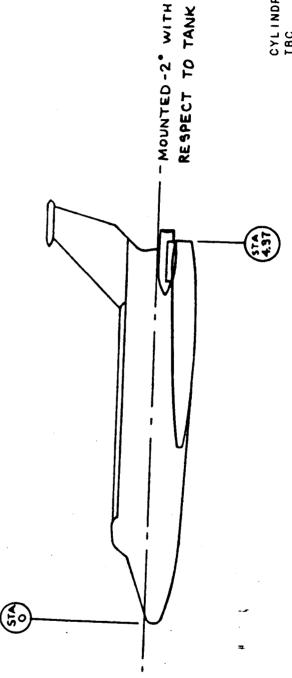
BOOSTER ASSEMBLY DRAWING
